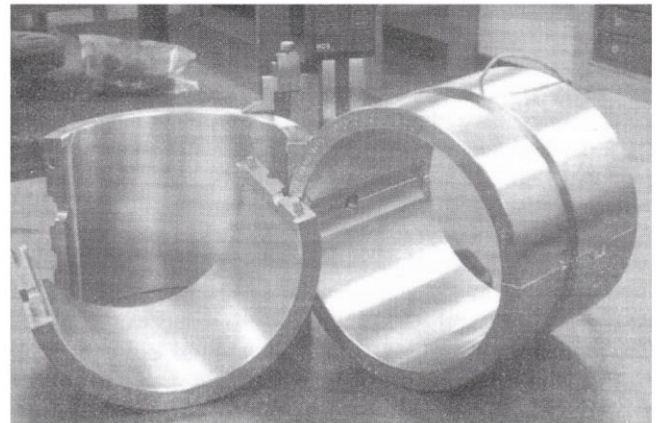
Photograph of Two Sleeve Bearings, Showing the Axial Oil Distribution Groove and the V-Notch Bleed-Off
